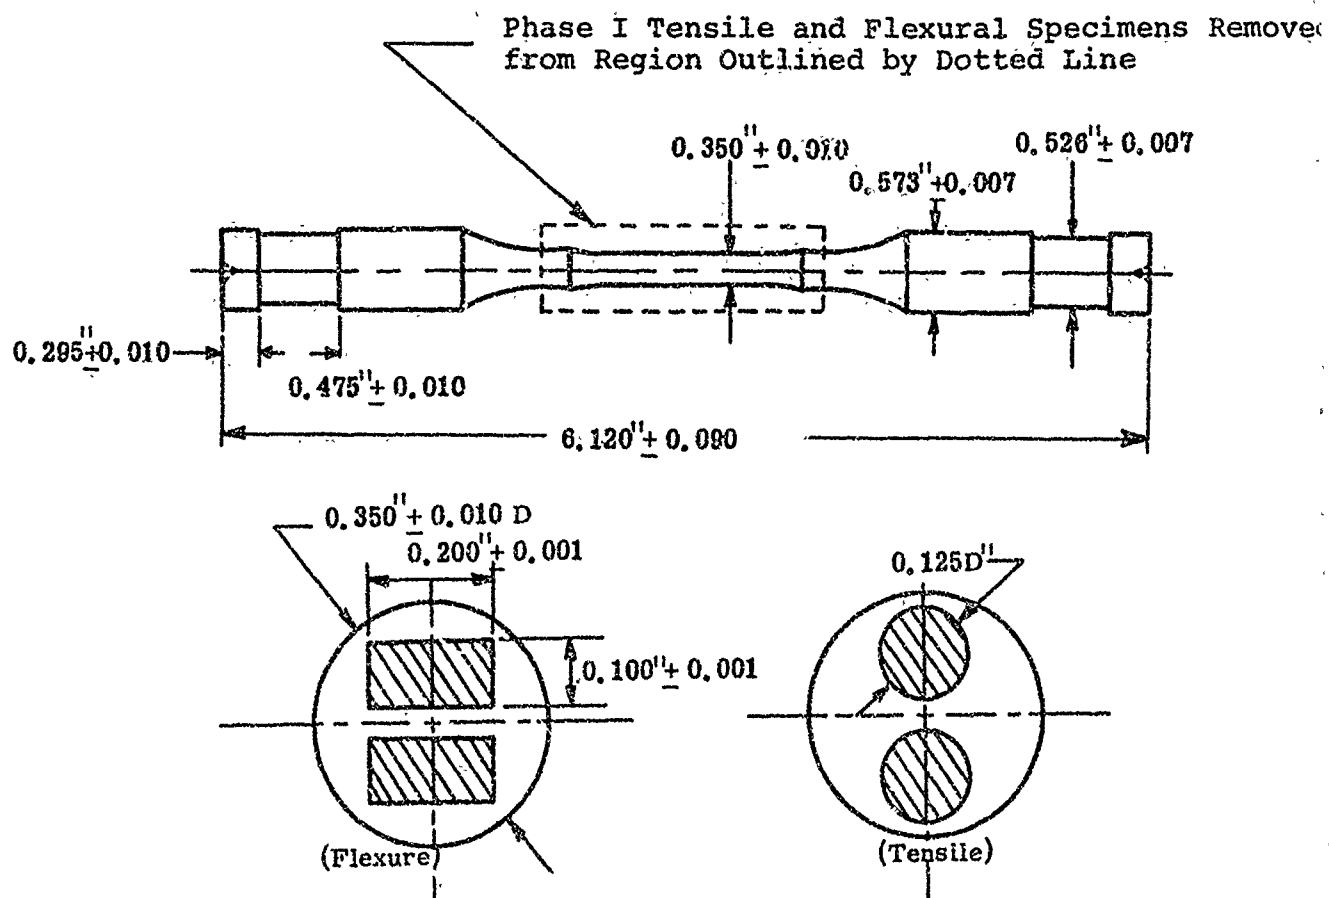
Configuration of Specimen Blanks 1A02 as received from Coors and Cutting Plan for Removing Phase I Tensile and Flexural Specimens
